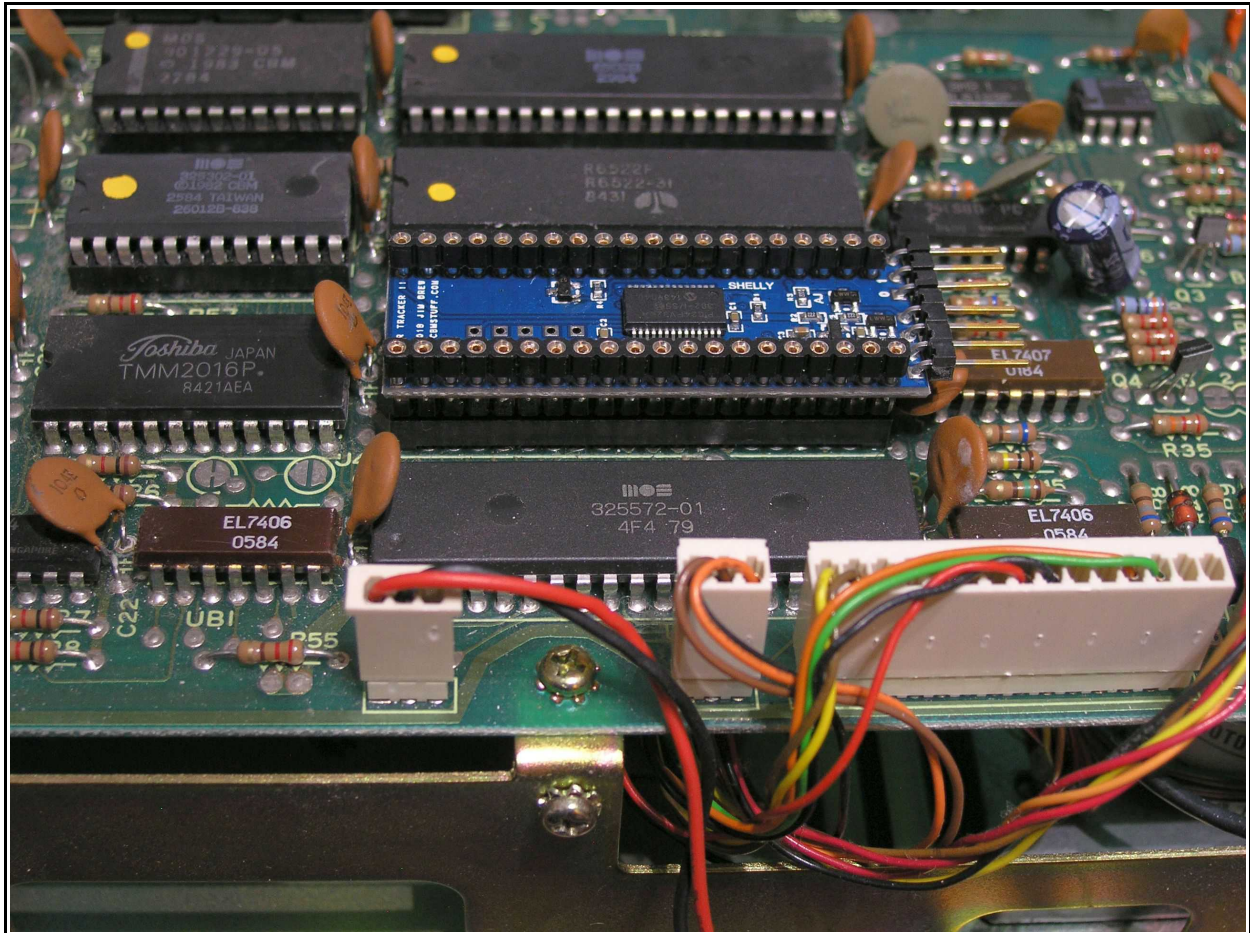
SuperTracker II Board Pressed Flush in Socket
